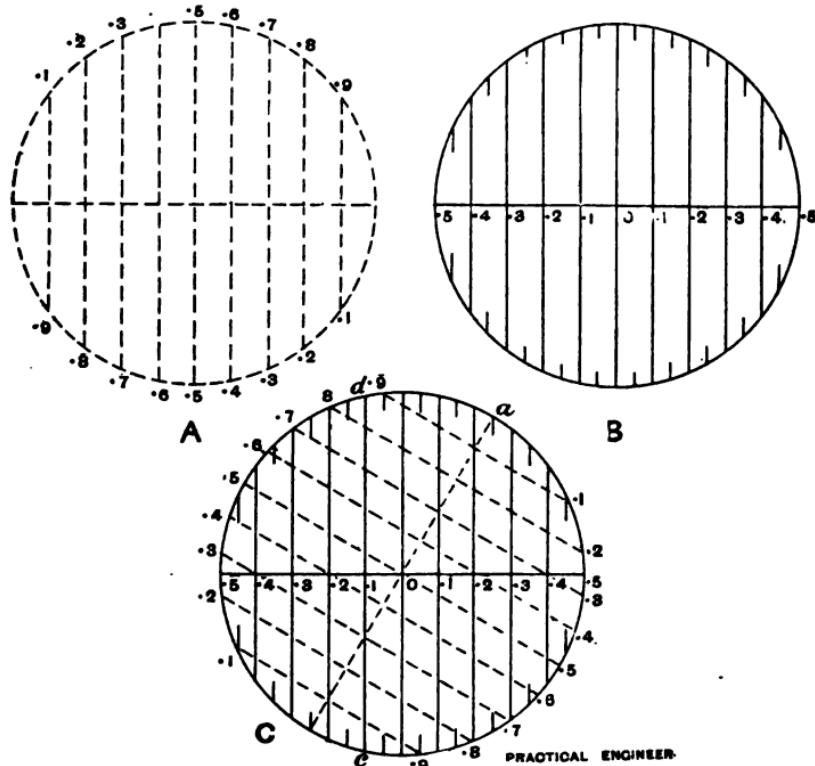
Handy method of determining points of cut-off, &c., for a slide valve.
